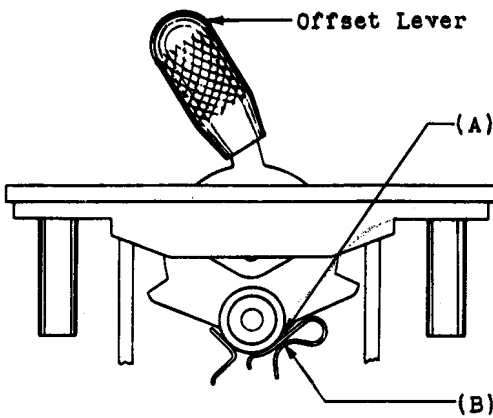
Illustrating Relation of Plunger Springs to Roller and Cam
